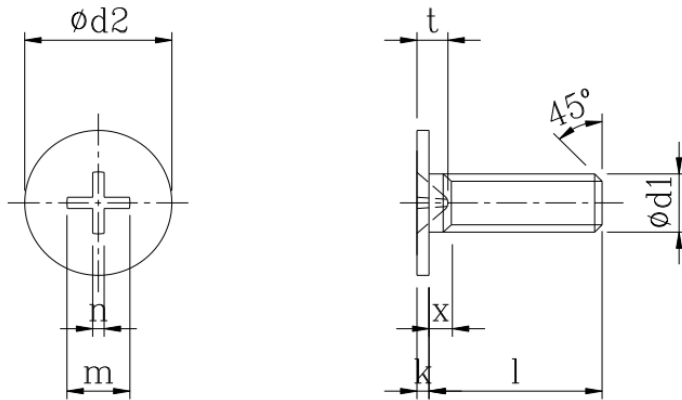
Mechanical drawing of FPHM1.6-0.35x3.5(5,0.5)CR3-Zn
